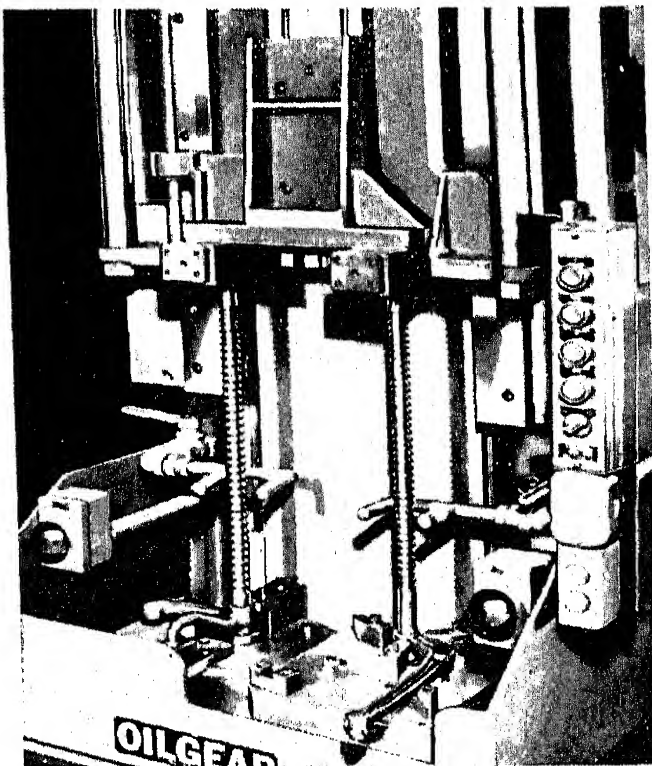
A view of a set up on a vertical pull down broaching machine. (Courtesy The Oilgear Co.)
